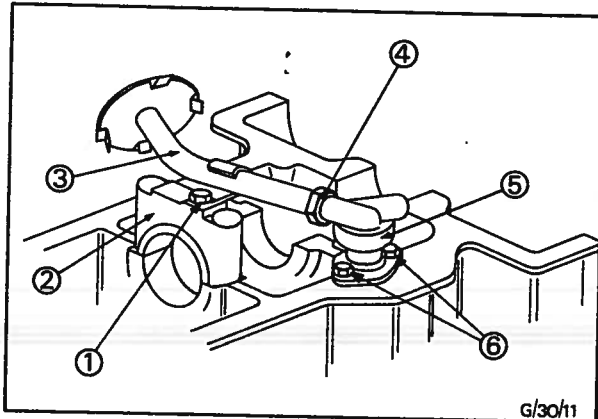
Oil Pump Removal/Replacement - 2722, 2723, 2725 and 2726T Engines Not Fitted with High Inclination Oil Pans
